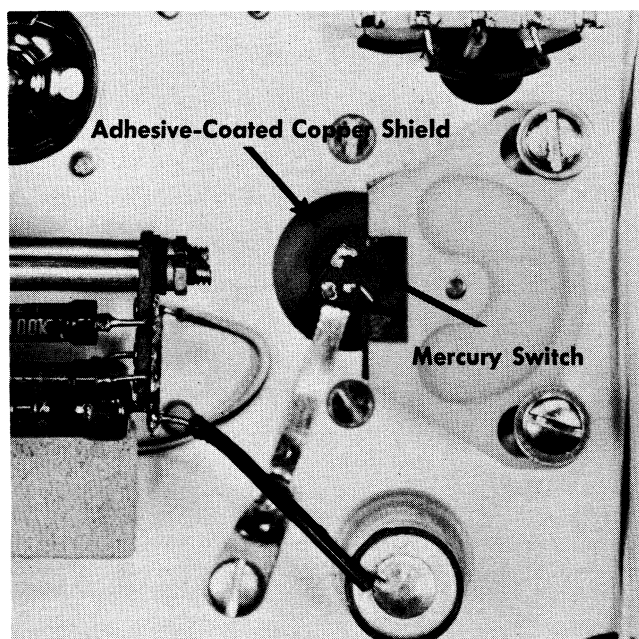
Top view of the Type S Unit showing the location of the mercury switch.
